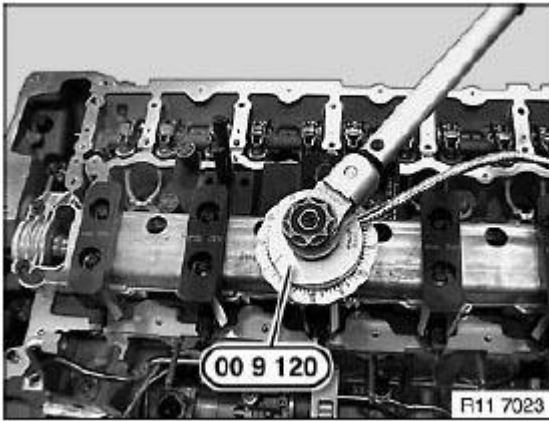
Tightening Lower And Upper Bearing Banks With Special Tool 00 9 120
